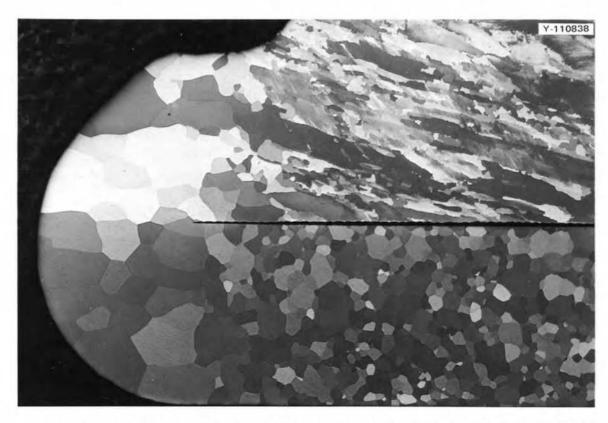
Cross section through a weld joining a 1.125-in.-OD tube to a half section. Etchant: 20 vol % $\rm H_2O_2-10$ vol % $\rm H_2SO_4$ (96% $\rm H_2SO_4$)-70 vol % $\rm H_2O$. 29×.
